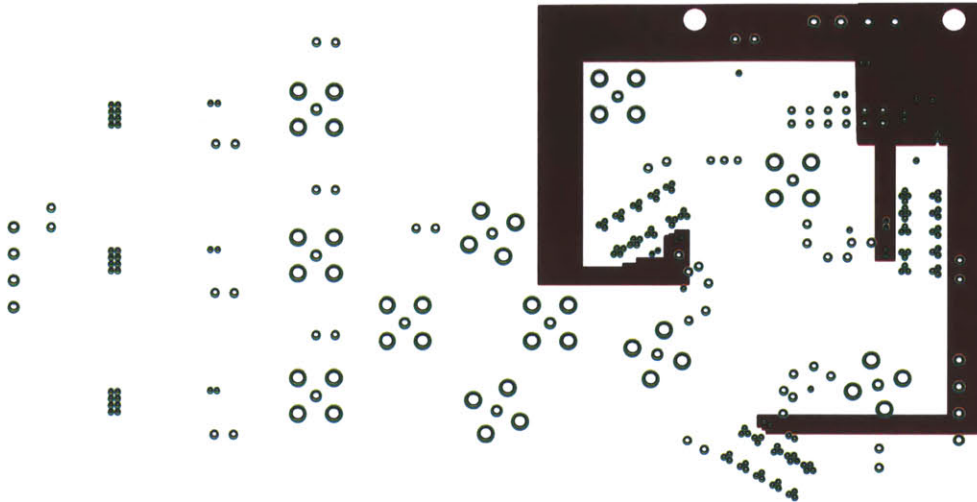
The Layer 3 PCB Layout of the Ac Power Delivery Discrete PCB Prototype.
